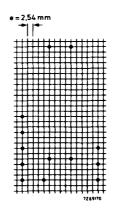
Hole pattern for mounting on a printed-wiring board (solder side). Grid holes 1, 3 ± 0, 1 mm.
